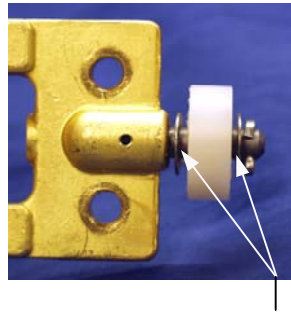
If original rollers are reused, apply Exxon / Beacon P290 grease to each side of nylon roller surface near axle and reassemble with both washers and the cotter pin. Rollers should rotate smoothly without radial play (Note: Parts on axle have been expanded to show washers)
